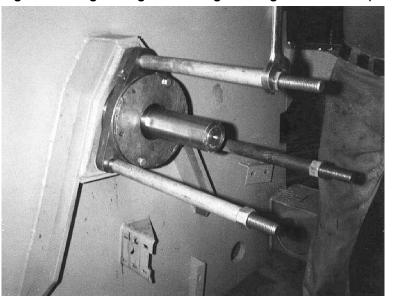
Tightening the Bearing Housing into the Shell (42" machine shown)
